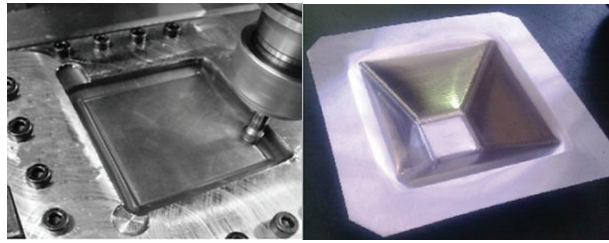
Experimental set-up and a pyramidal workpiece formed by single-point incremental forming
